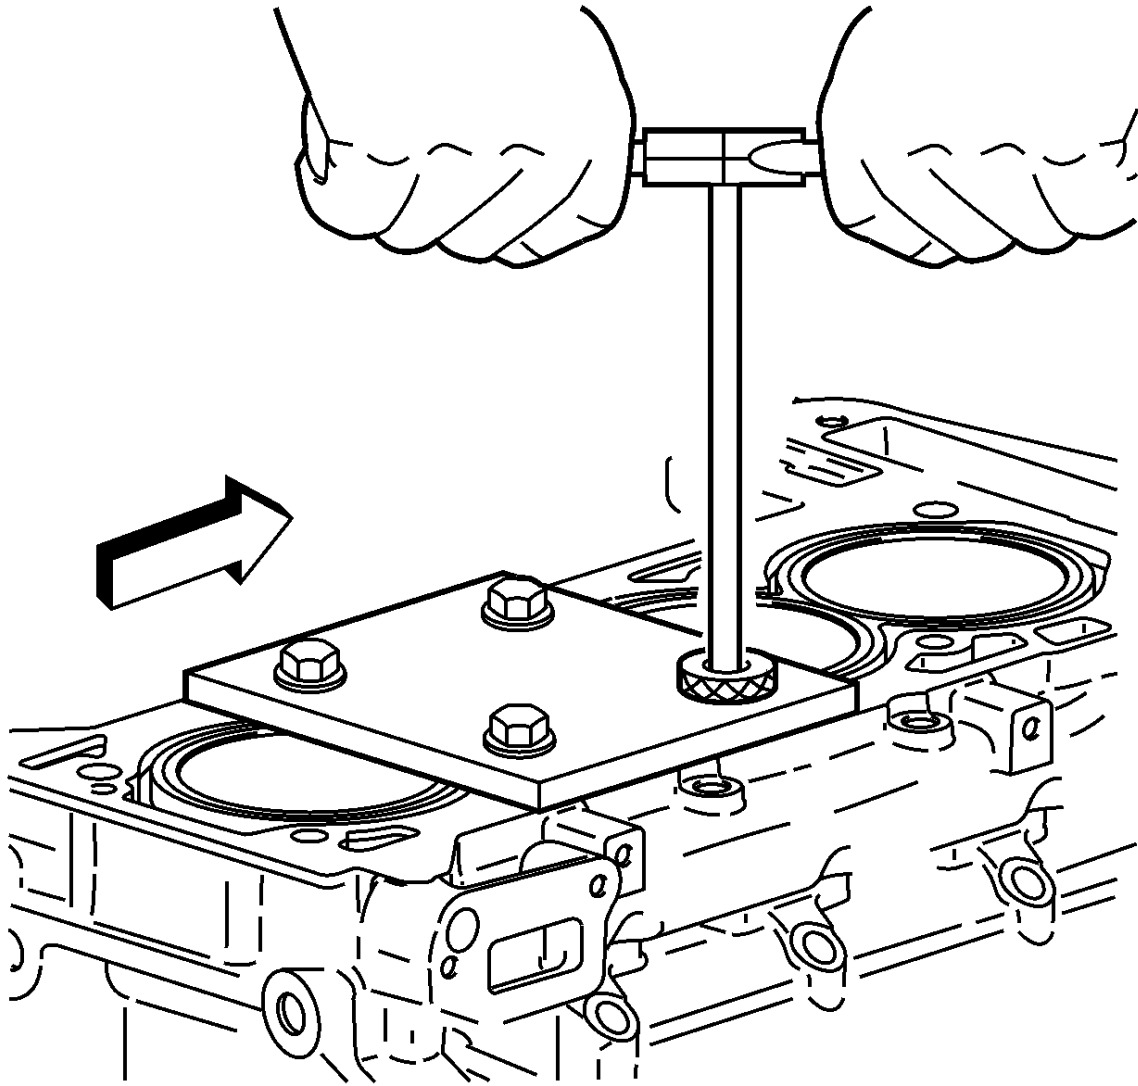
Tapping Threads Of Drilled Hole With Tap Wrench
